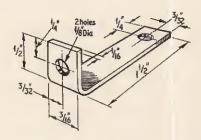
Bracket for mounting the relay. The final dimensions depend on the relay used (see text)
